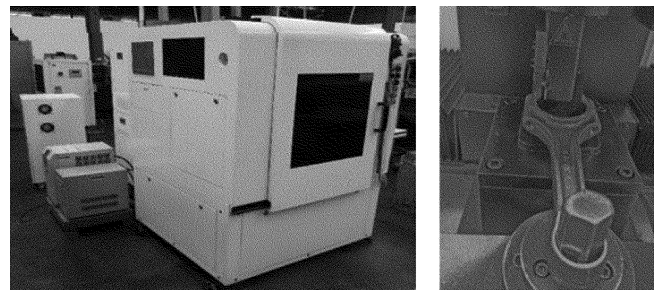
Laser cutting equipment for processing connecting-rod splitting notch
